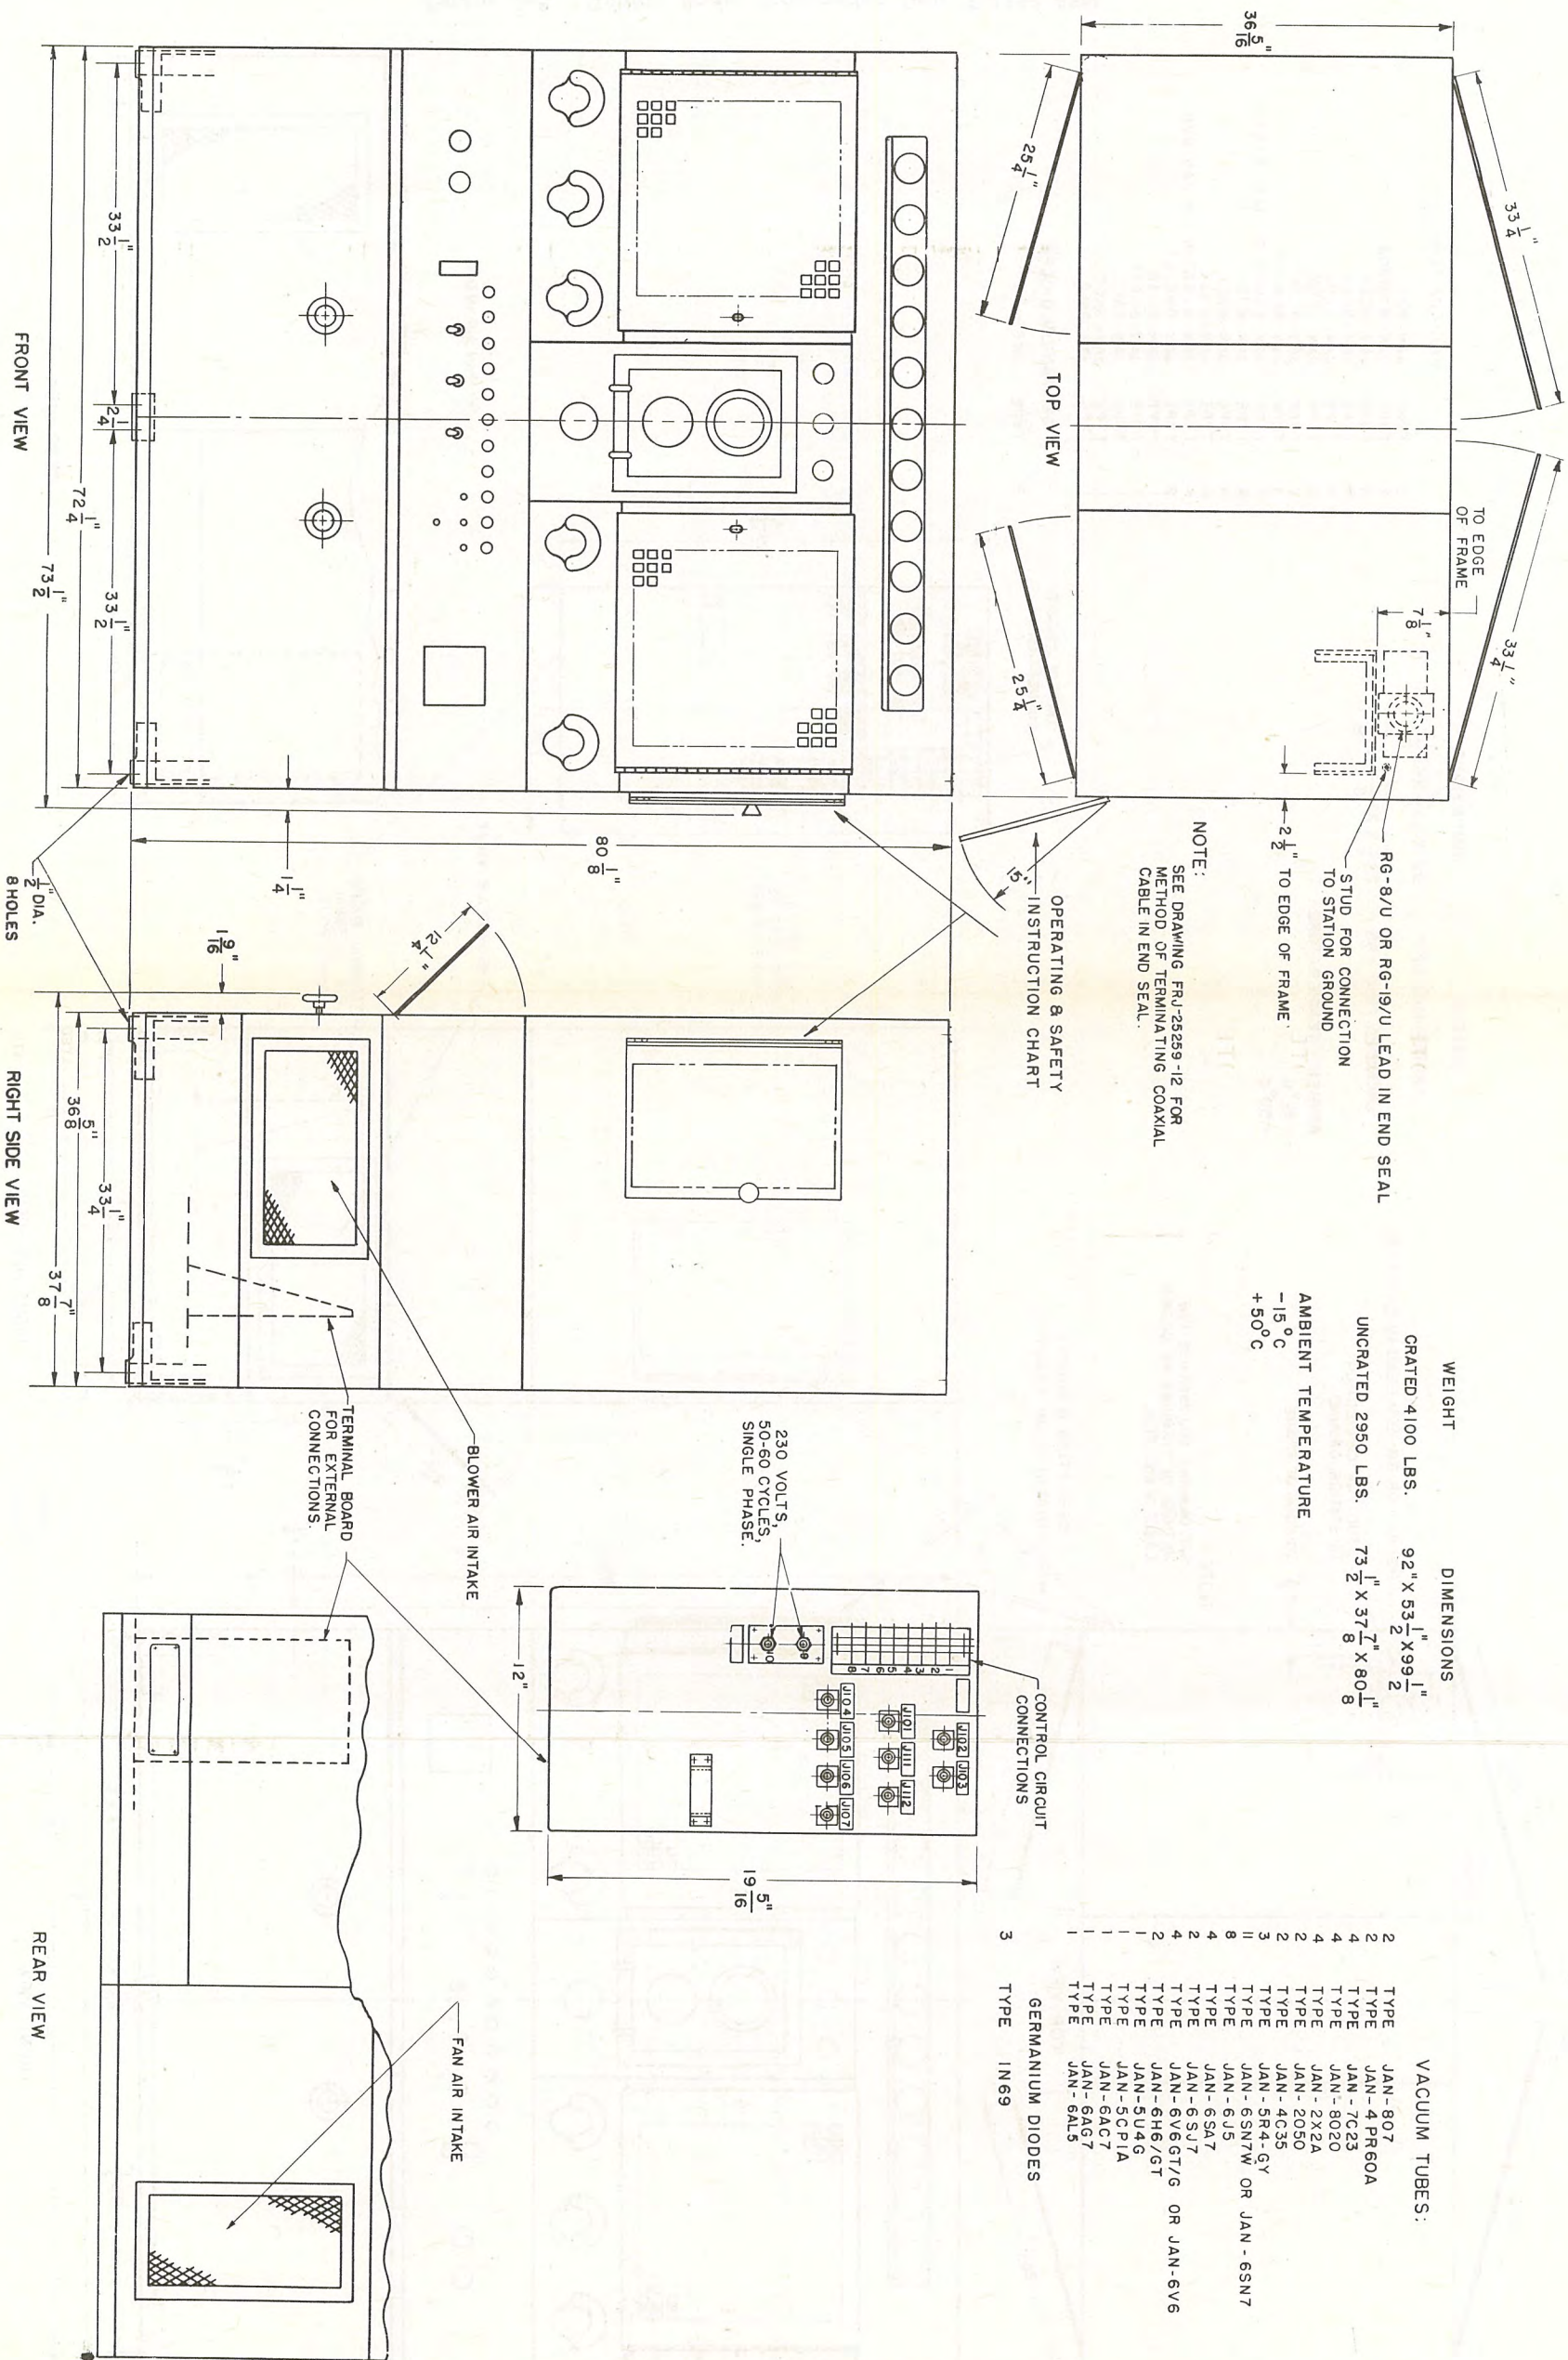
Outline, Radio Transmitter Type T-325B/FPN
